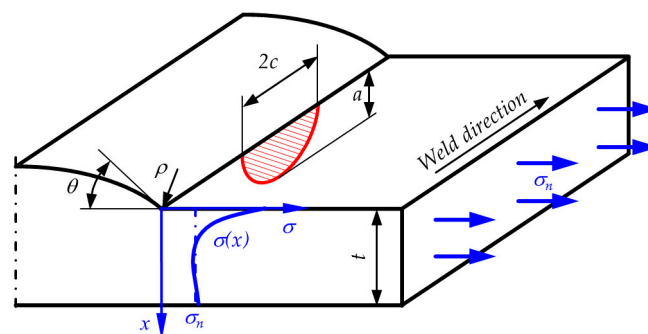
Sketch of the weld geometry including weld and crack geometry parameters.
